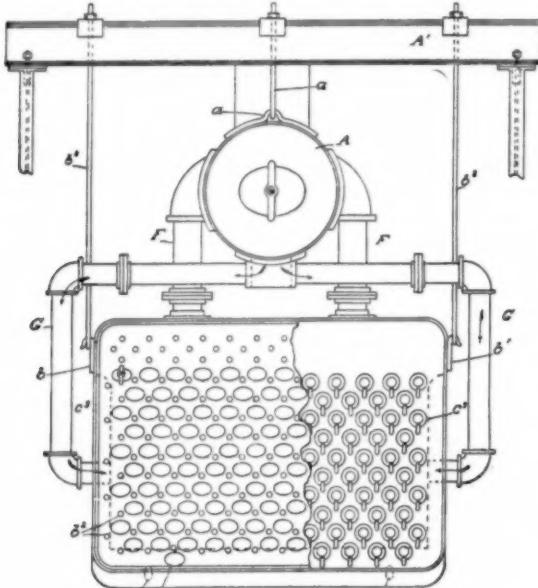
HAMMOND WATER-TUBE BOILER.
